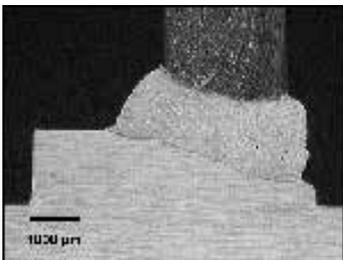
Disc laser welded skin-stringer joint in AlMgSc alloy (courtesy of Airbus)
